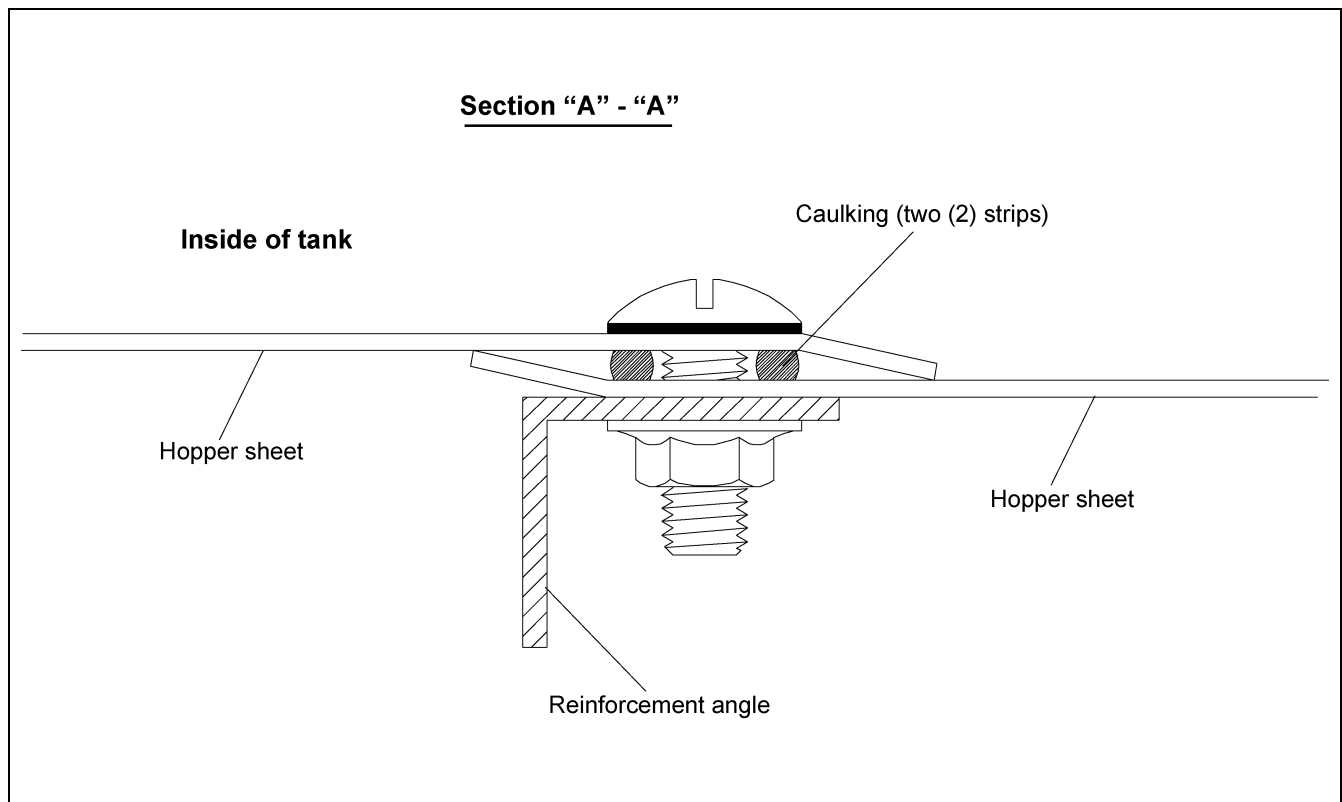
F Hopper Overlap and Bolt Detail w/ Reinforcement Angle
